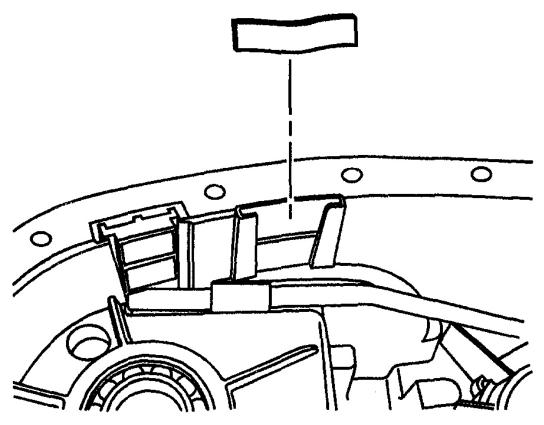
Installing Oil Pump Suction Pipe Assembly
